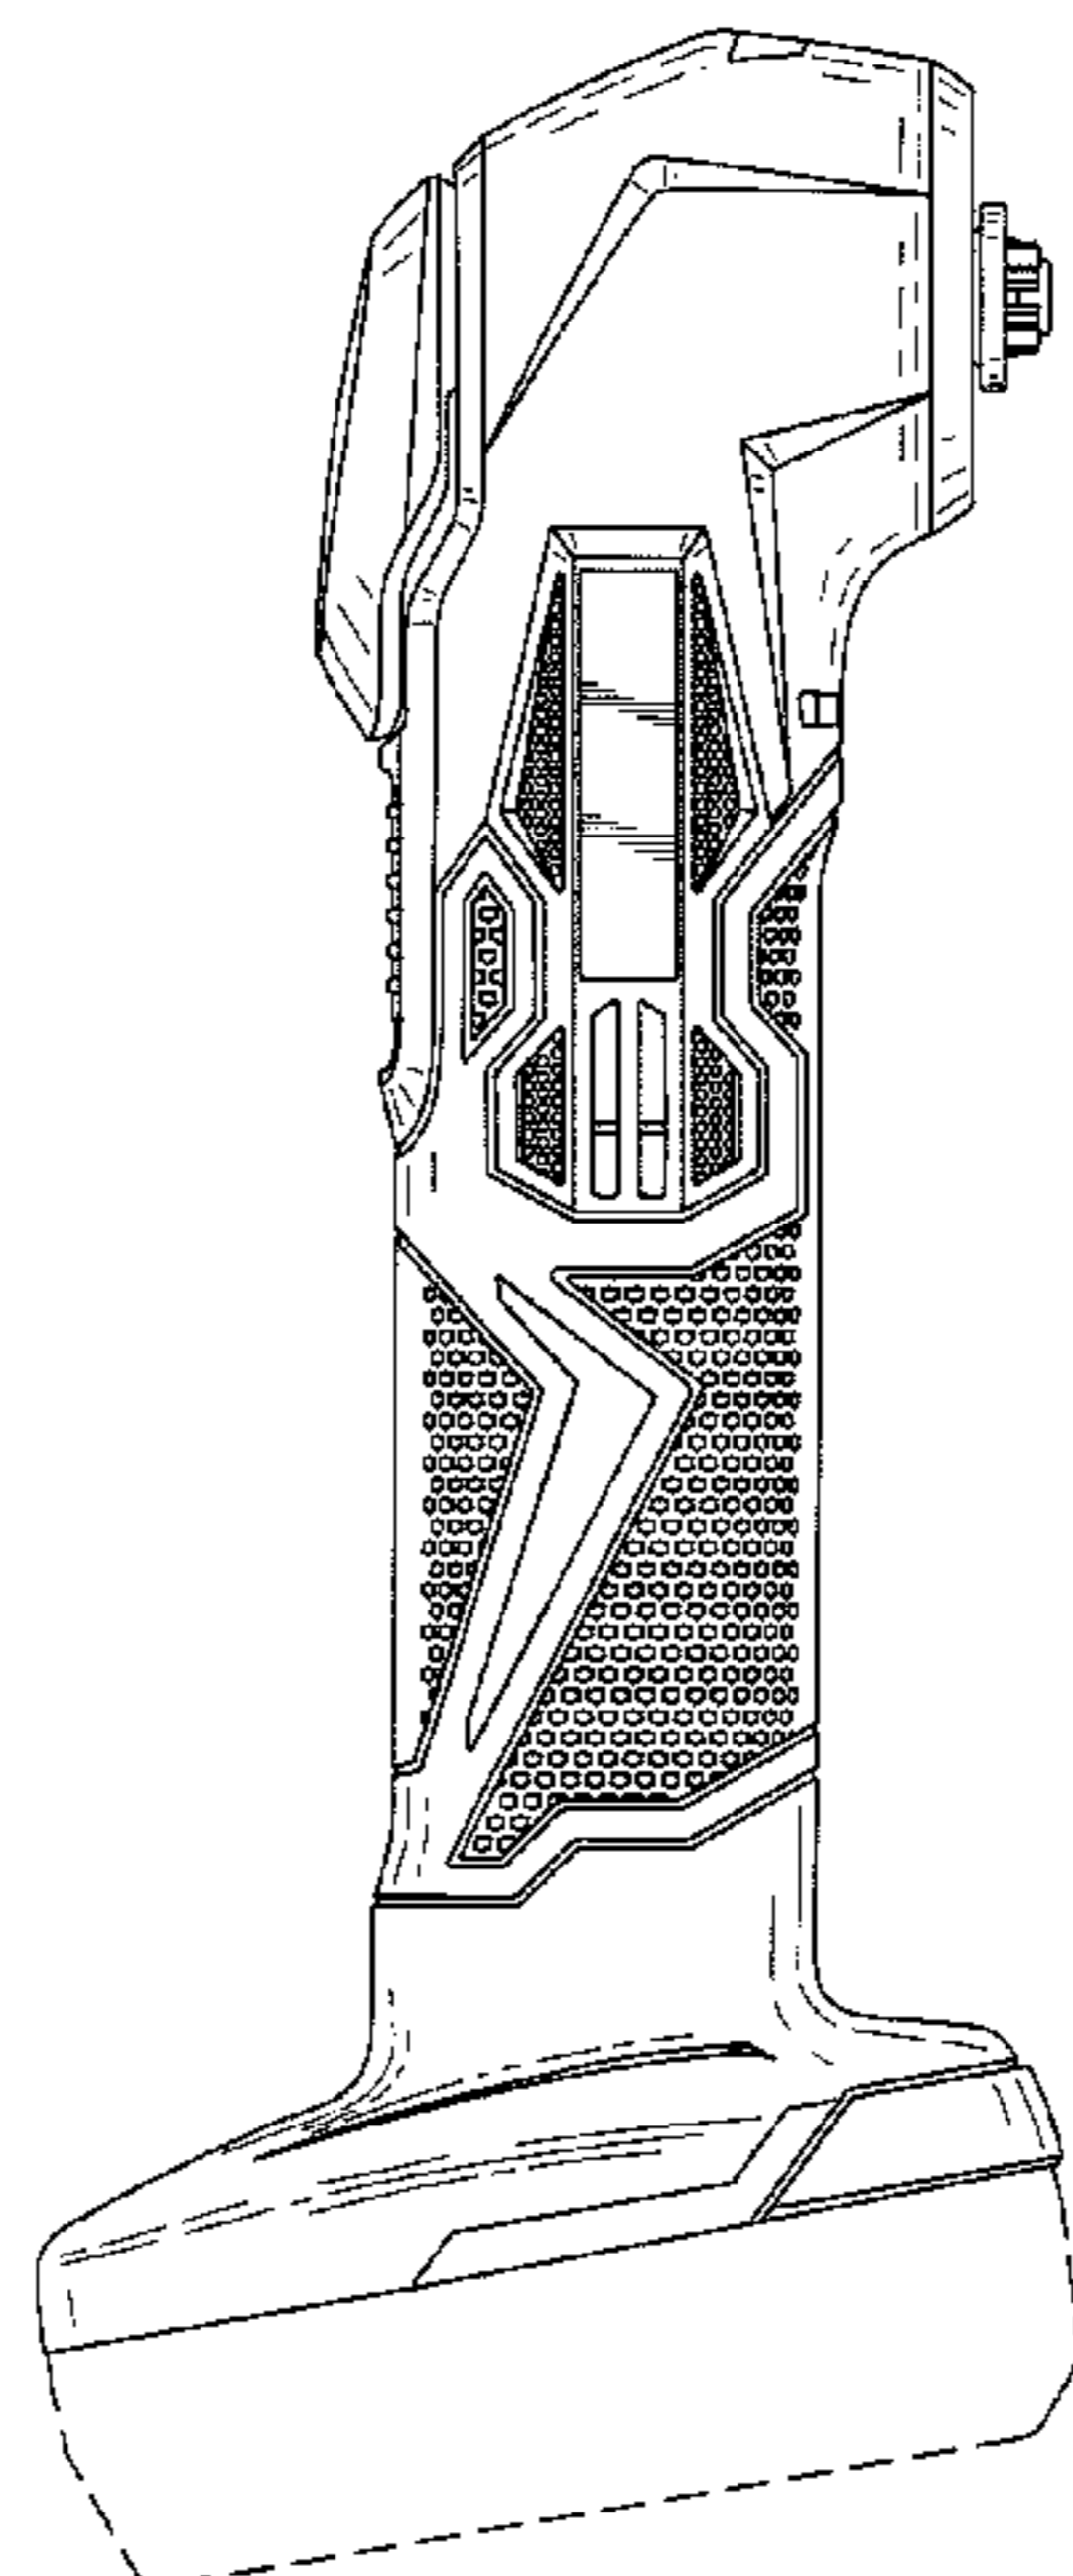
is a front elevational view of the oscillating tool shown in FIG. 1;
